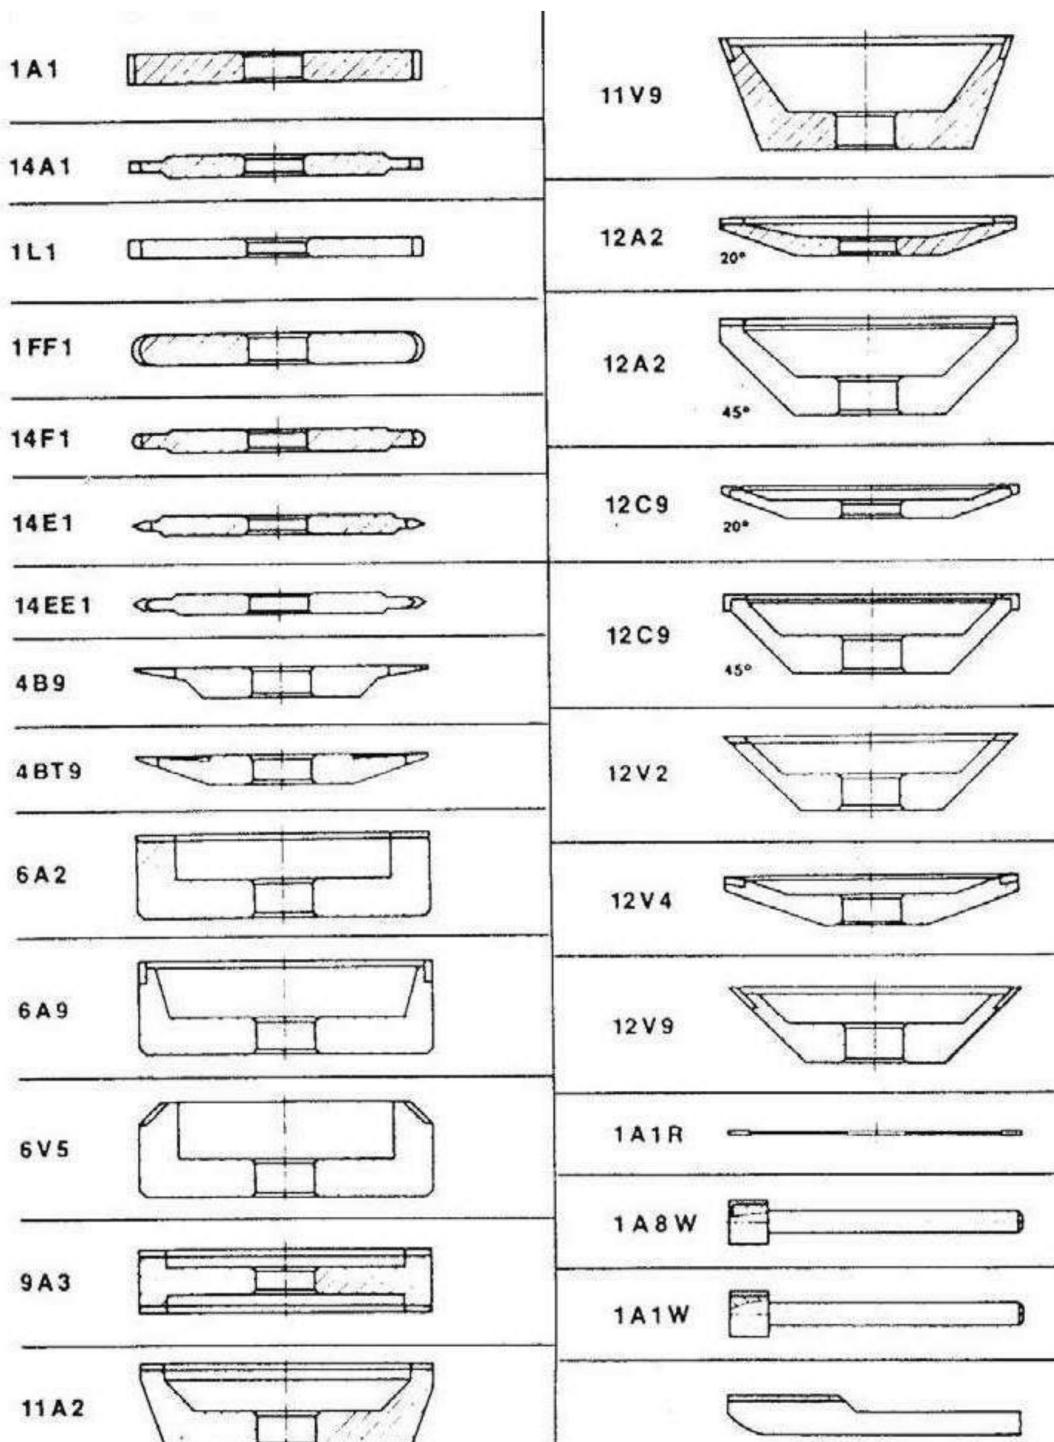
Standard wheel configuration for super abrasive wheel
